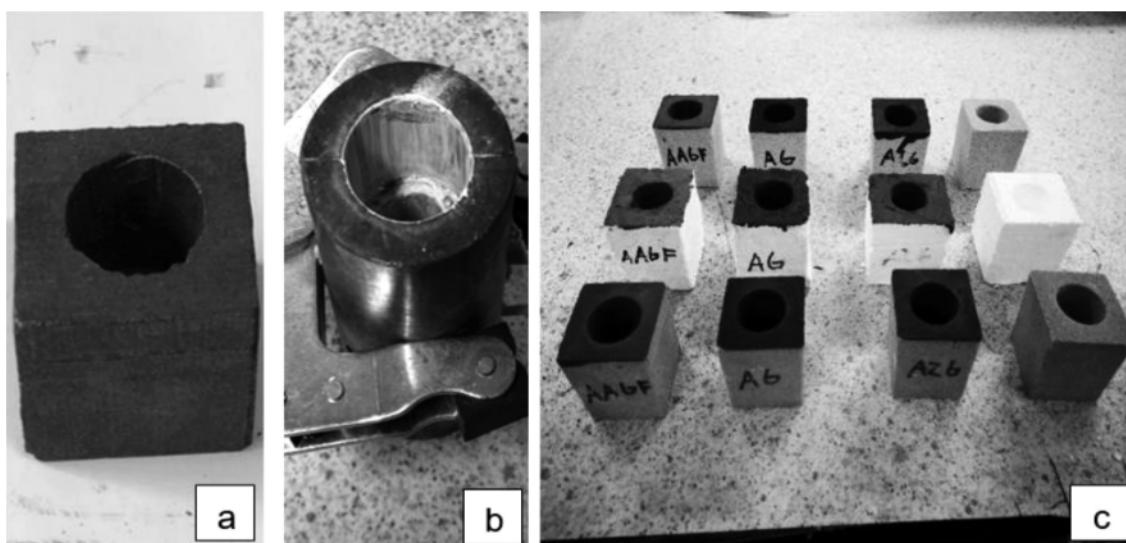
Prepared moulds: a) graphite mould, b) steel mould, and c) first row Croning process moulds with different coatings, second row calcium silicate moulds with different coatings, and third row CO₂ process moulds with different coatings
